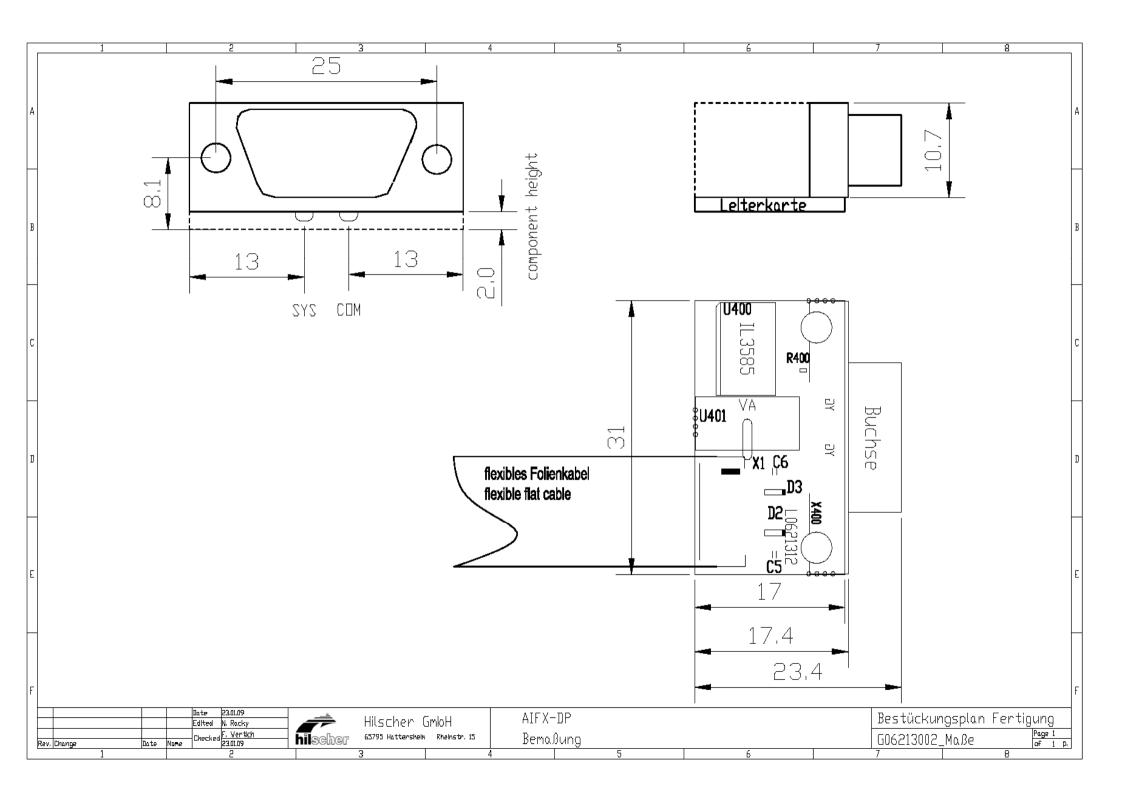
Device Drawing Assembly interface AIFX-DP (back side)
